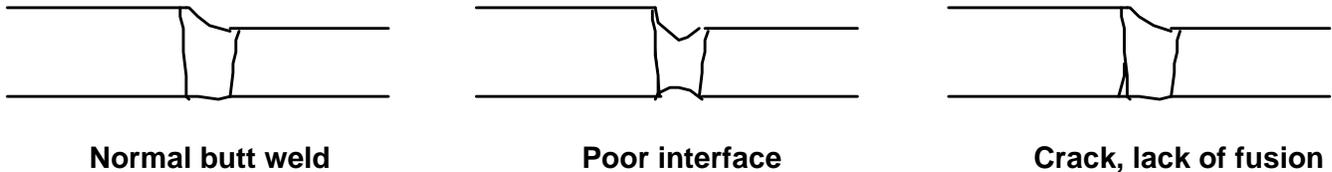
Schematic drawing of normal laser butt weld and poor weld with concave surfaces.
